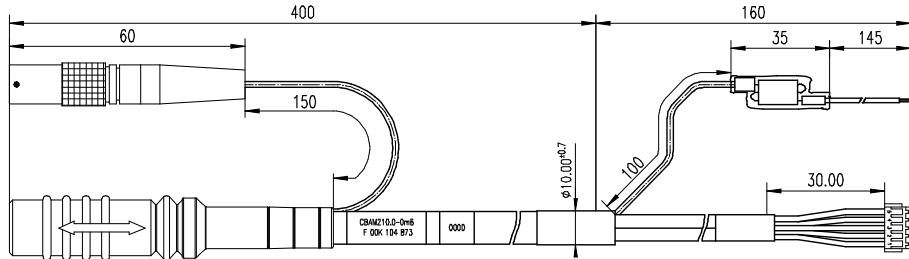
Combined Interface and Power Supply Cable CBAM210
